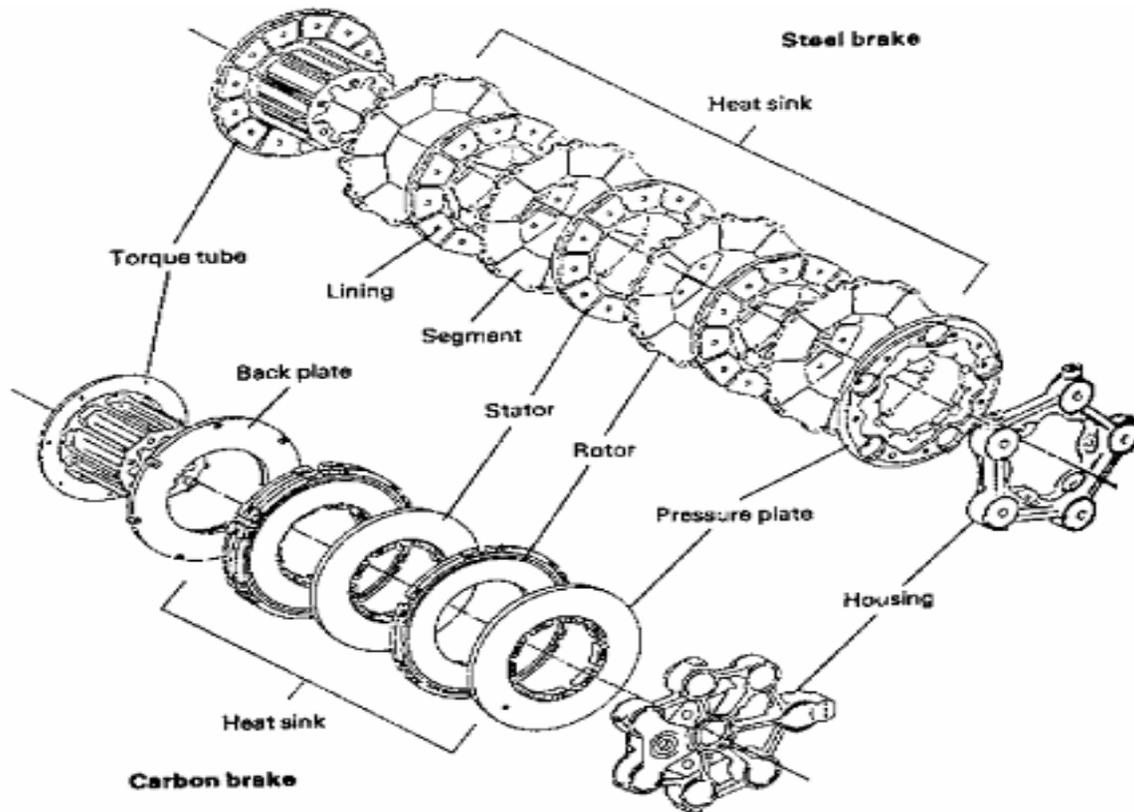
Brake unit assembly of Carbon and Steel Brake
